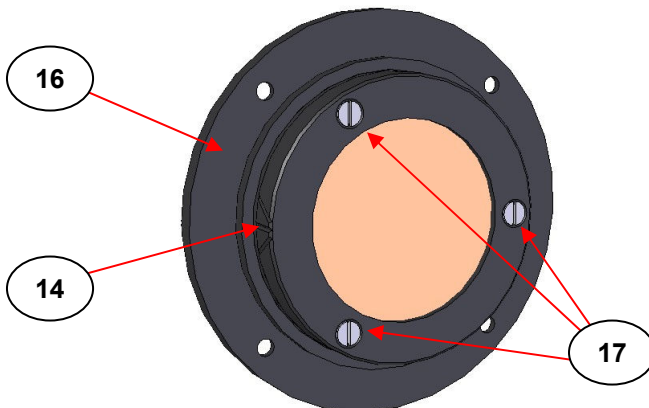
Removed Assembly of Polarizer Already Fitted to the Circular Plate for a Polarizer Replacement
